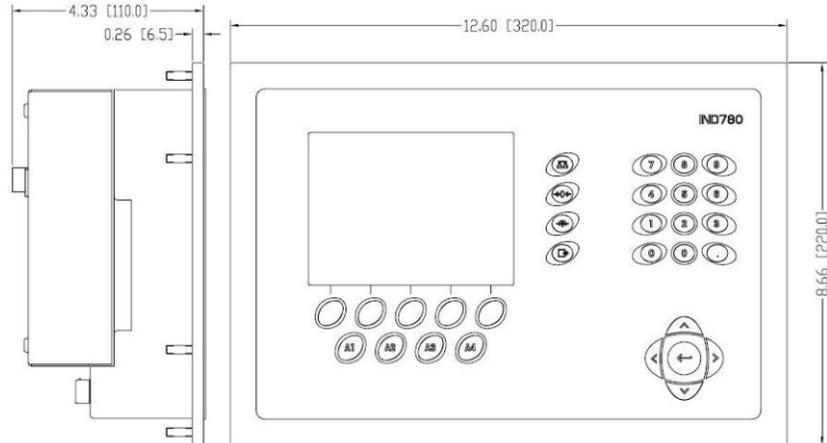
IND780batch Panel Mount Terminal Dimensions
